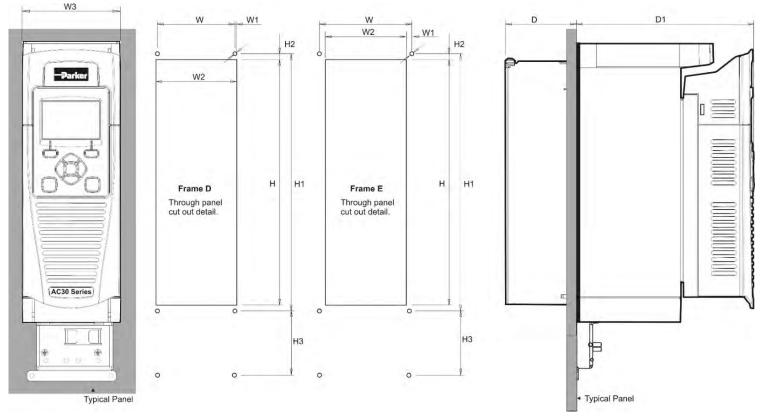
Mechanical Dimensions for Through Panel - Frames D & E Inverters
